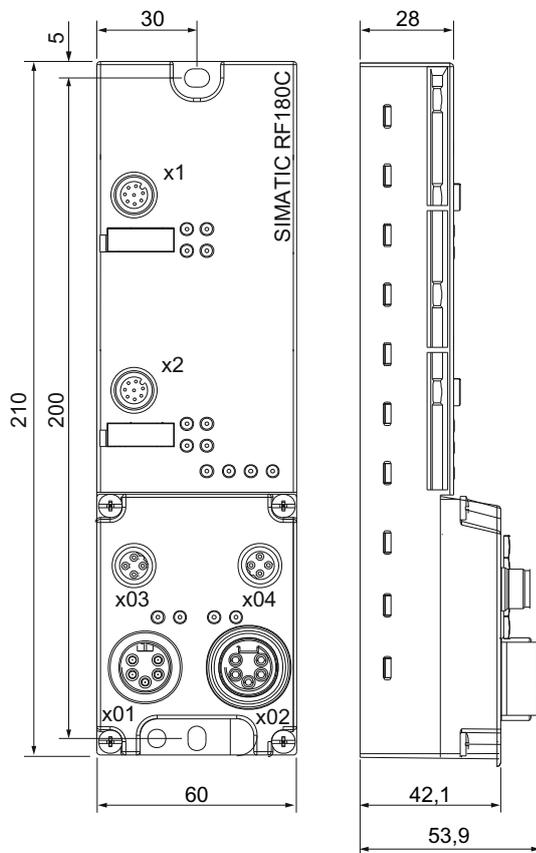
Dimension drawing of an RF180C with M12 bus connection block (7/8" PN)
